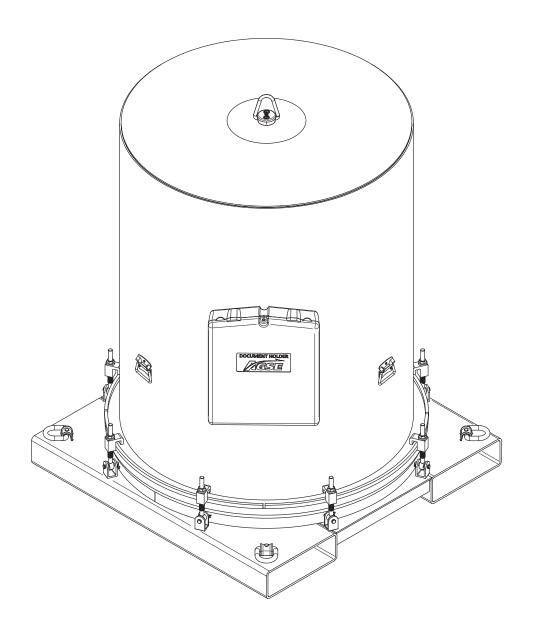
AGSE-C012-G01 Module 2 Container Assembly
